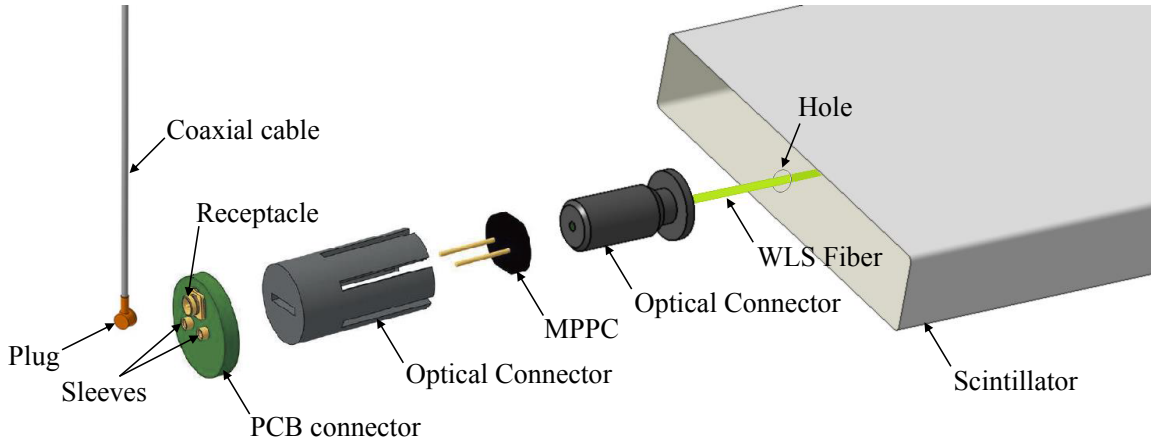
Schematic view of the readout components for INGRID and Proton Module.
